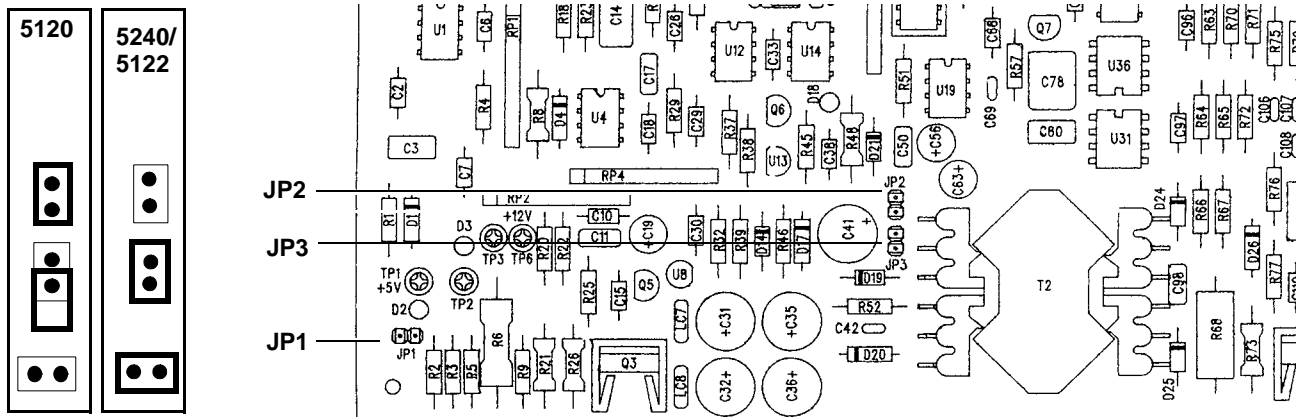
Jumper locations, ACHV board FRU 0184504
